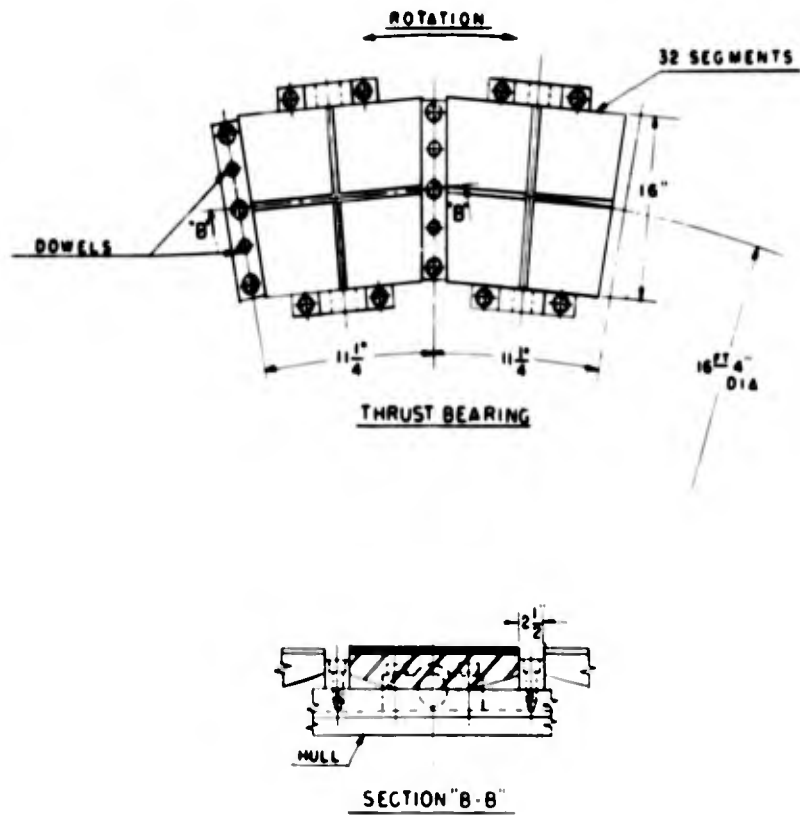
GENERAL ELECTRIC Propulsion Motor Thrust Bearing
